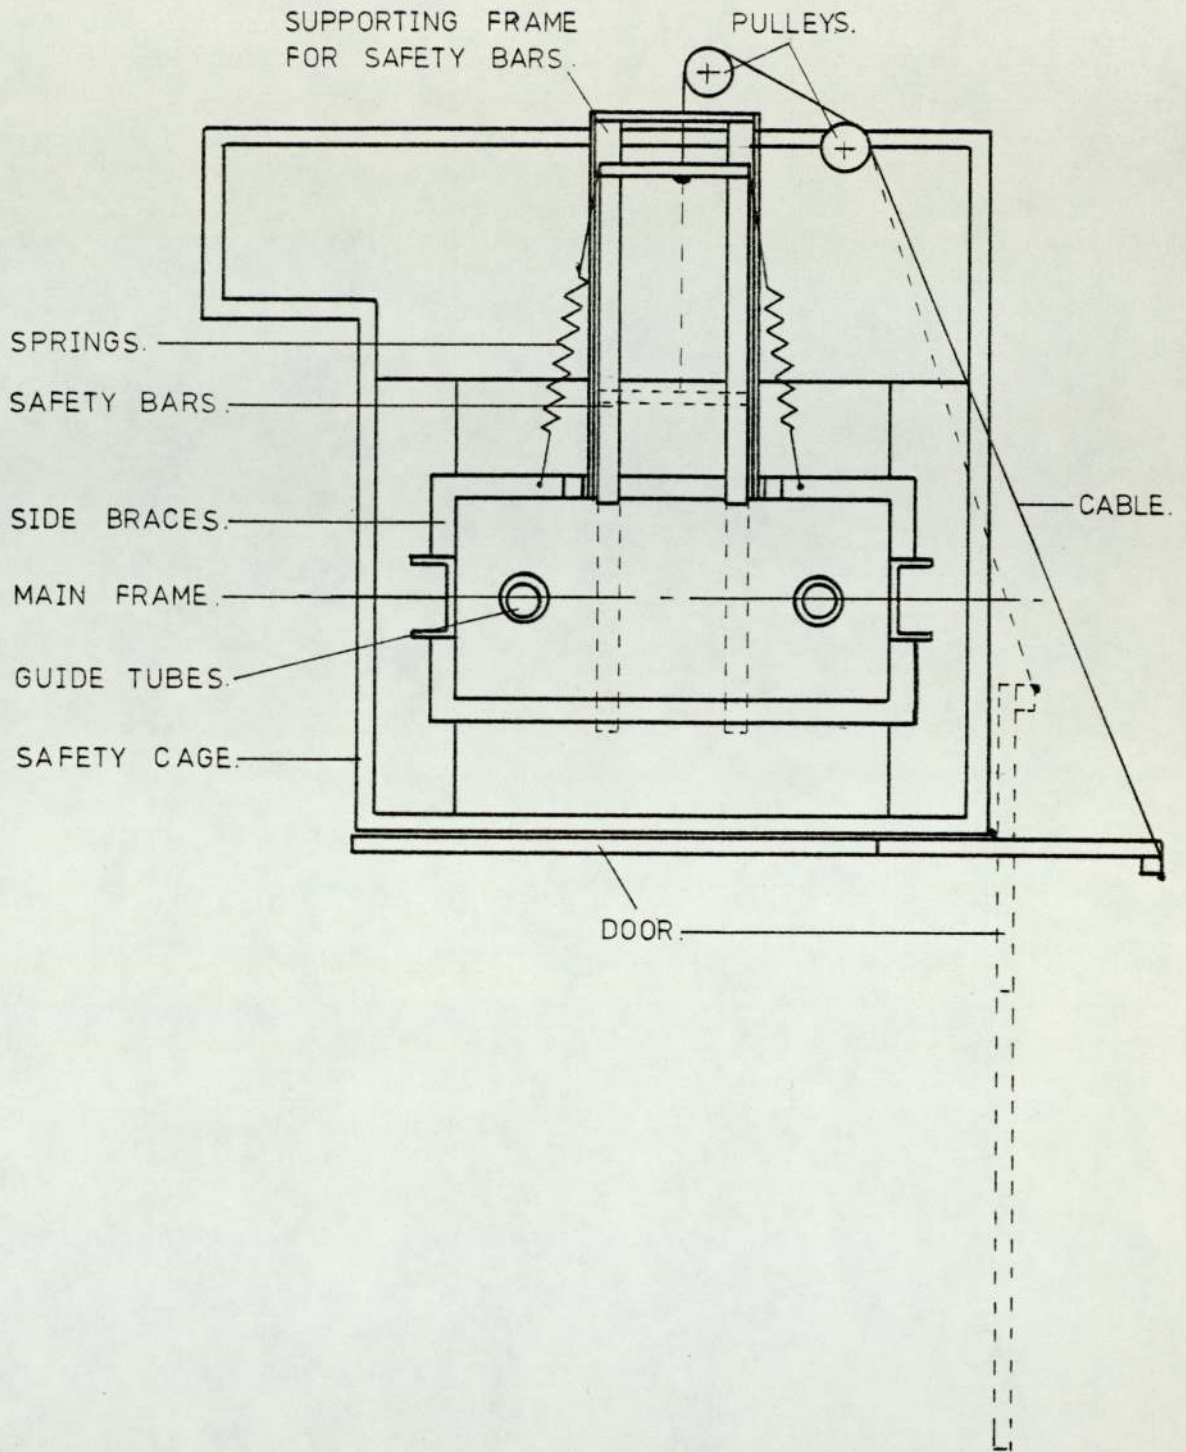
SHOWING OPEN AND CLOSED POSITIONS OF DOOR AND SAFETY BARS. (PLAN VIEW).
